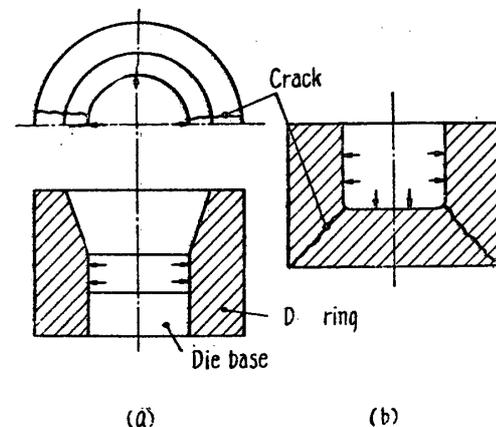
Radial Cracking (a) and Cracking along Conical Surface (b) of Die.
